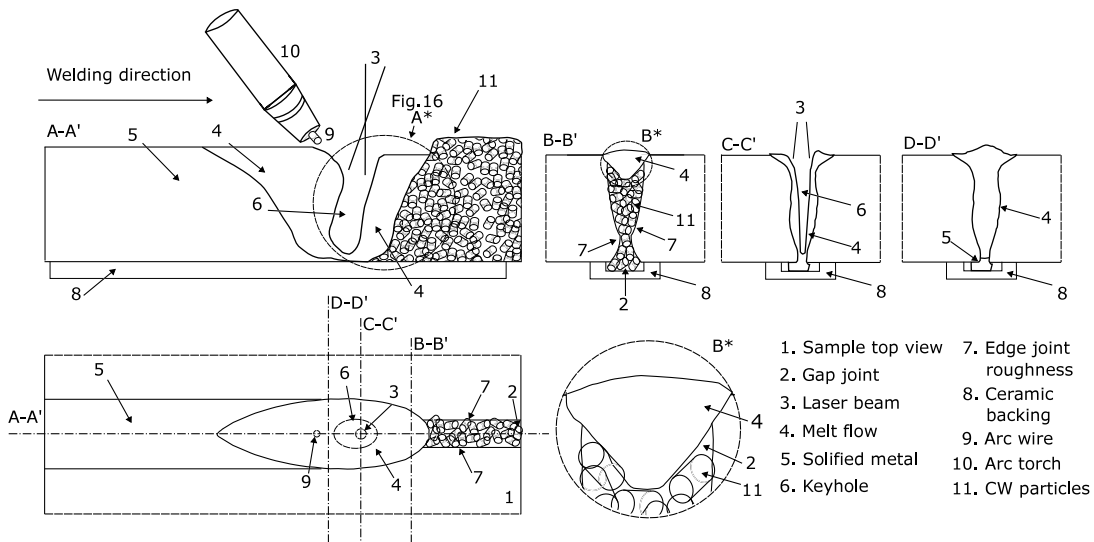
Evolution of the molten pool in LAHW welding with cut-wire samples. (Note: Non-scale drawing.)
